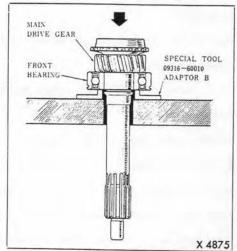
Installing the transmission front bearing on the main drive gear with special tool.
